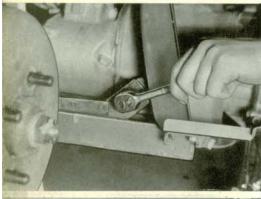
Slacken the two lower rubber mountings, right and left. (socket spanner 14 mm with ratchet)
